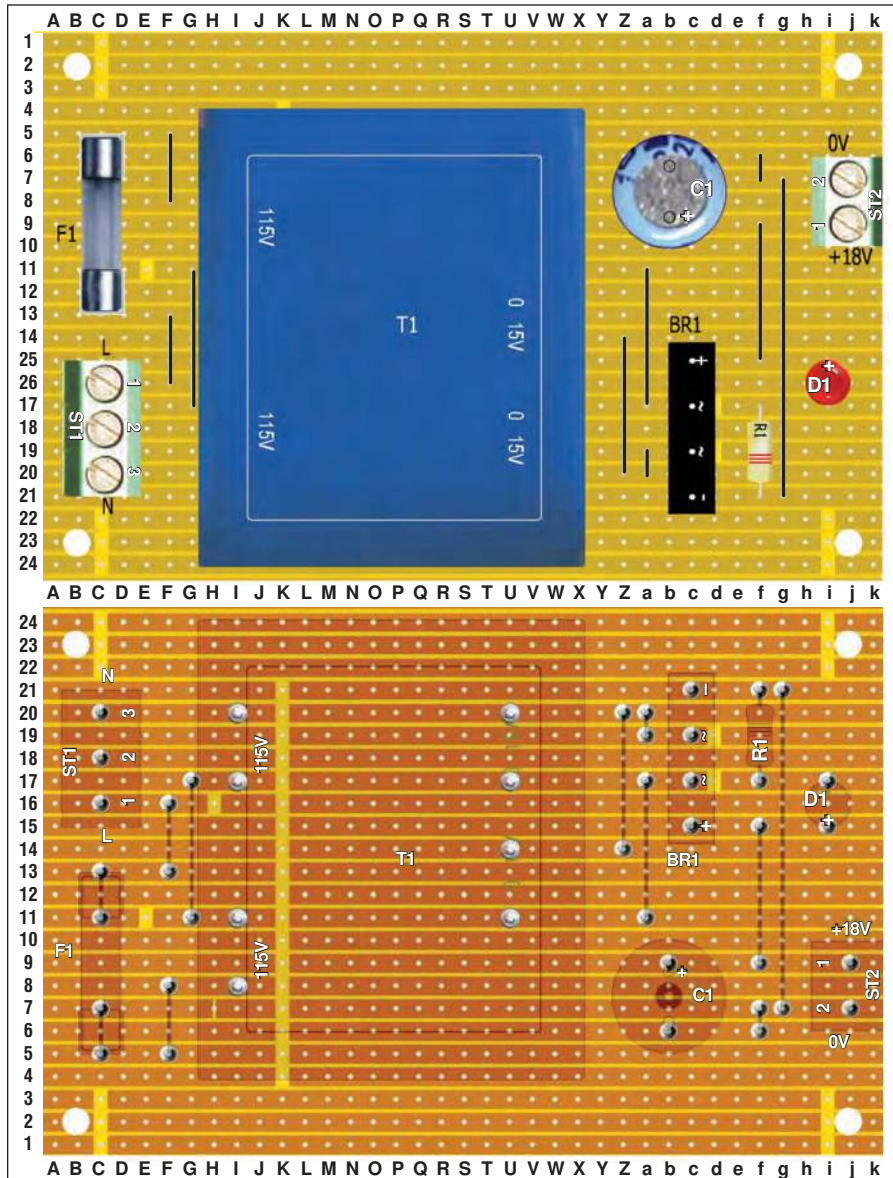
Stripboard layout of the 18V 0.5A raw DC supply: (top) component side, (below) copper track view (cut tracks marked in yellow)
